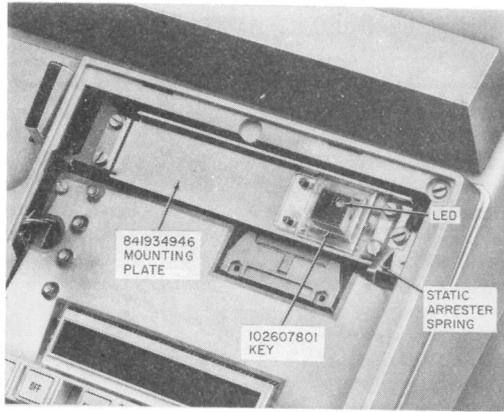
5100BM With Faceplate Removed Showing Mounting Plate and 102607801 Key Installed
